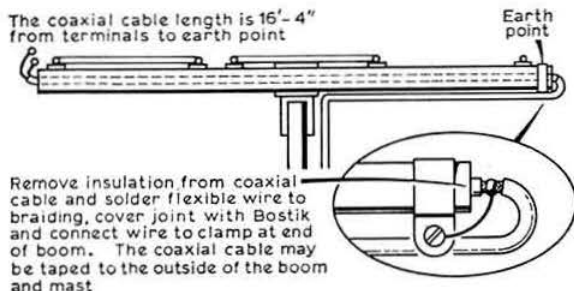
Details of a coaxial "bazooka" using the boom as a sleeve
